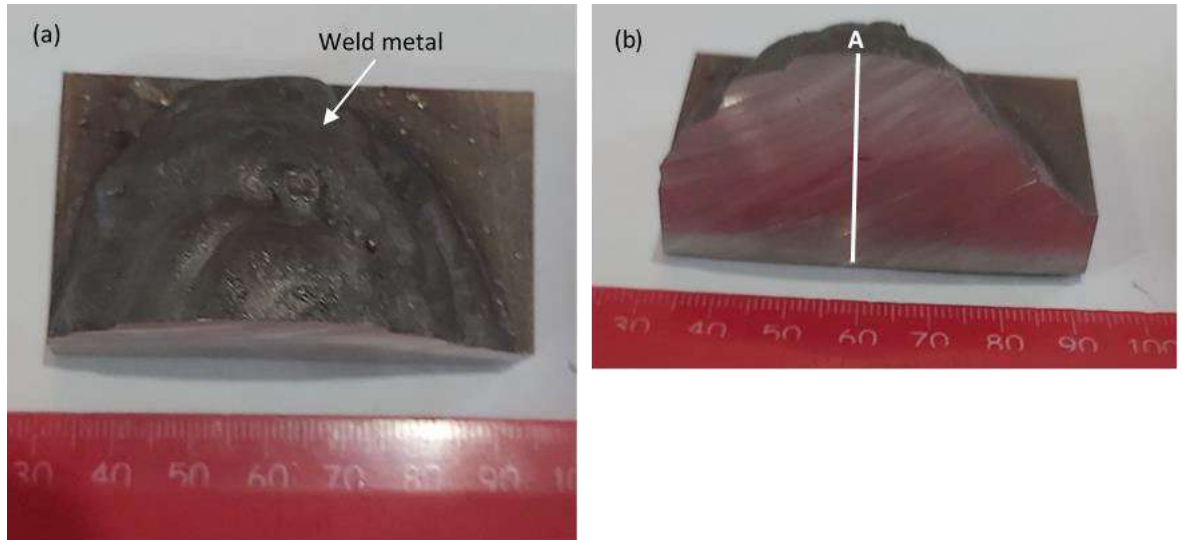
(a) Pre-existing weld area for machining, (b) measurement of the amount of material removed by the burr on surface A.
